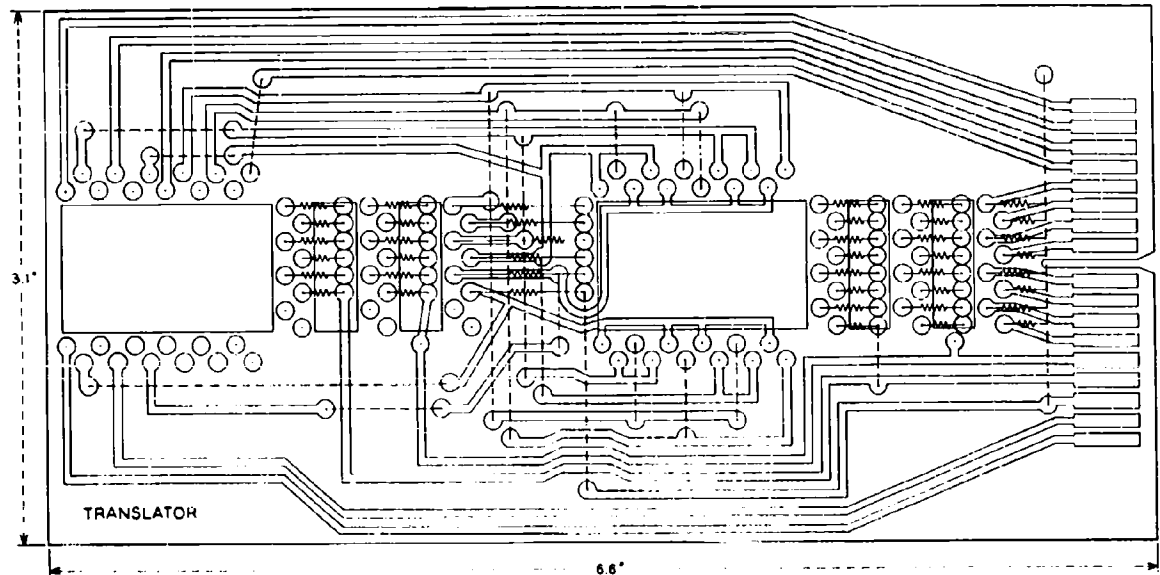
Layout plan of translator on printed-wire board using multiple device packages. Package A contains eight common-emitter transistors, package B contains eight level-shifter diodes, and package C contains 24 computer-diodes.
